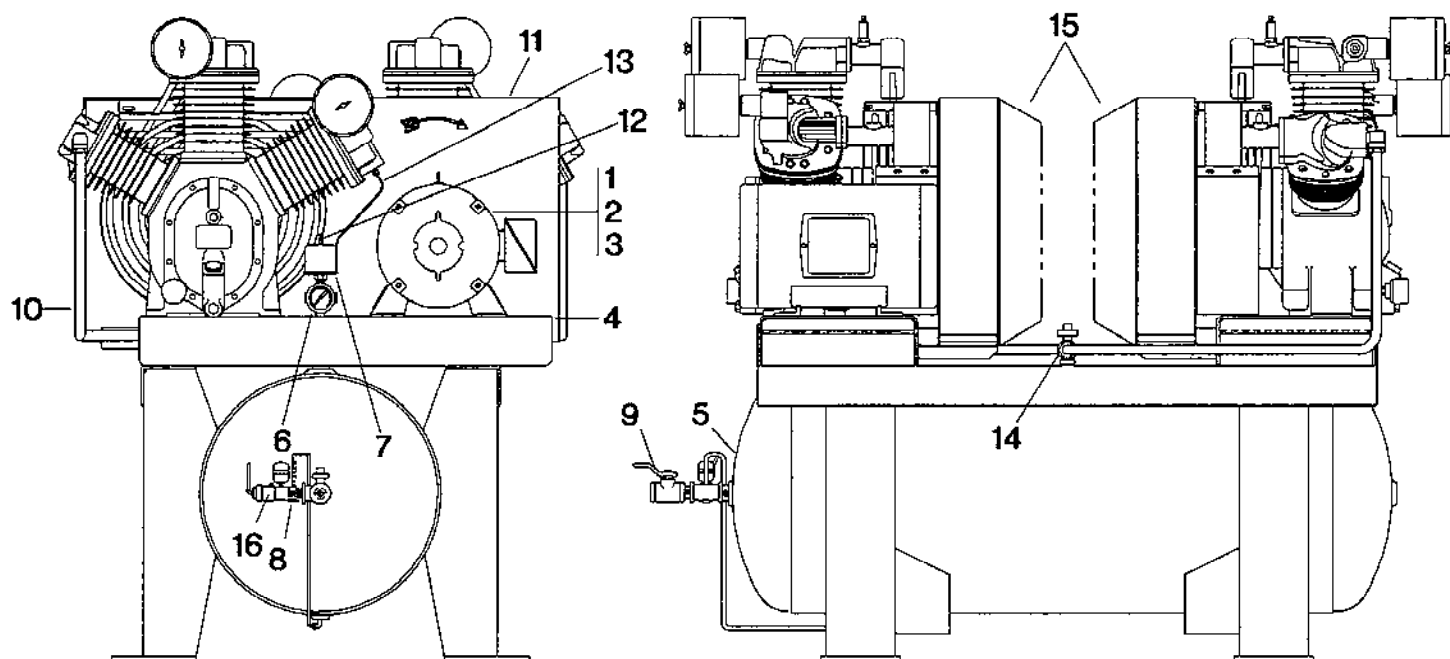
TYPICAL SIMPLEX PACKAGE.
